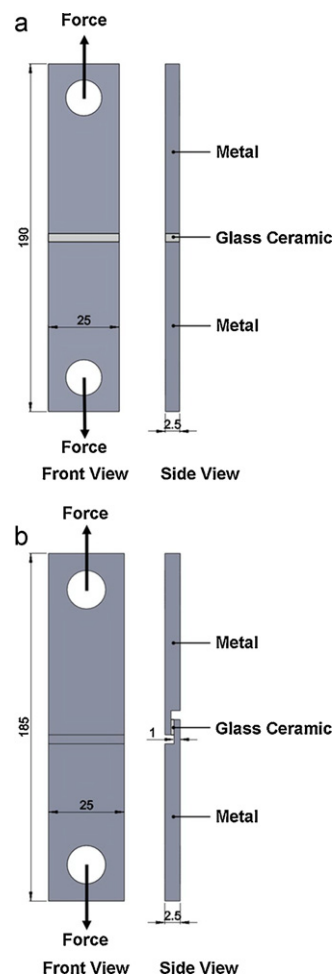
Scheme of two types of joint specimen: (a) tensile specimen and (b) shear specimen (dimensions: mm).
